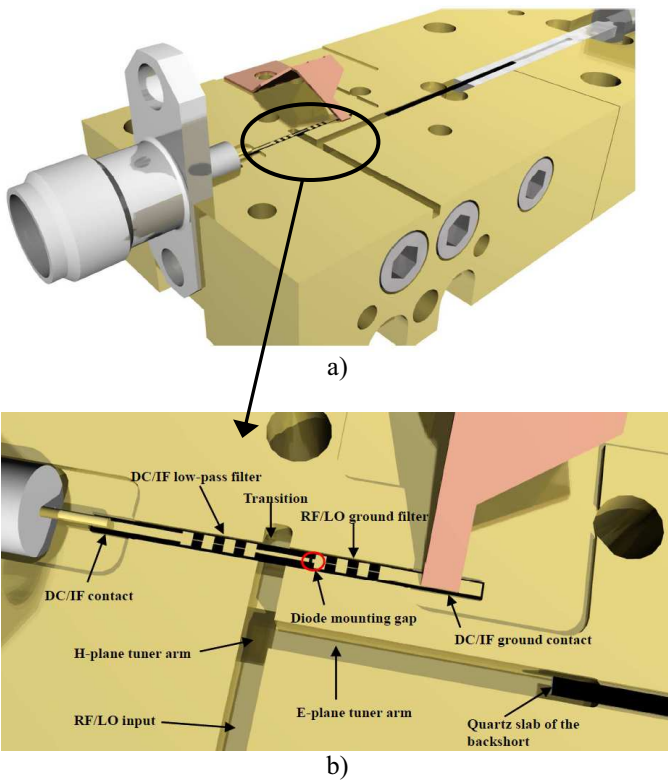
3D-model of the lower waveguide block of the mixer test jig. a) Wider view, b) closer view.
